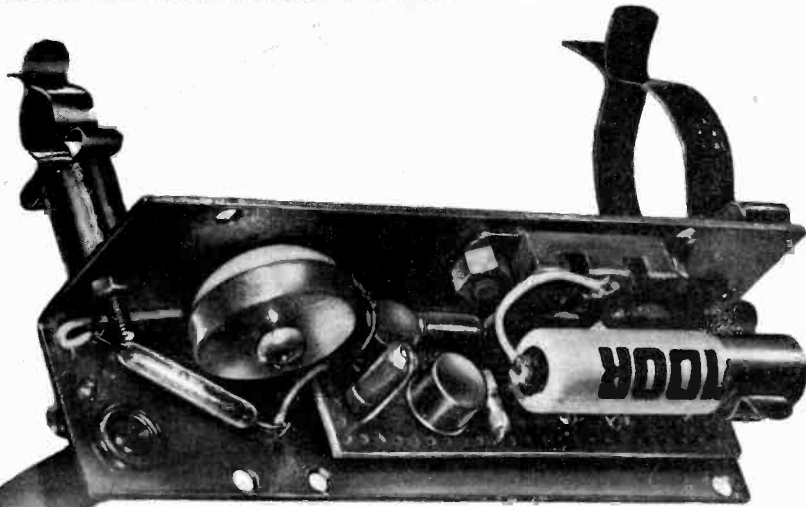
(right). The electronic assembly. Most of the circuit components are mounted on the small piece of perforated board. The board is secured to the housing by the same screw which secures the battery clip; a 4 B.A. nut must be positioned on the screw, between the rear of the board and the metal housing, as a spacer.
